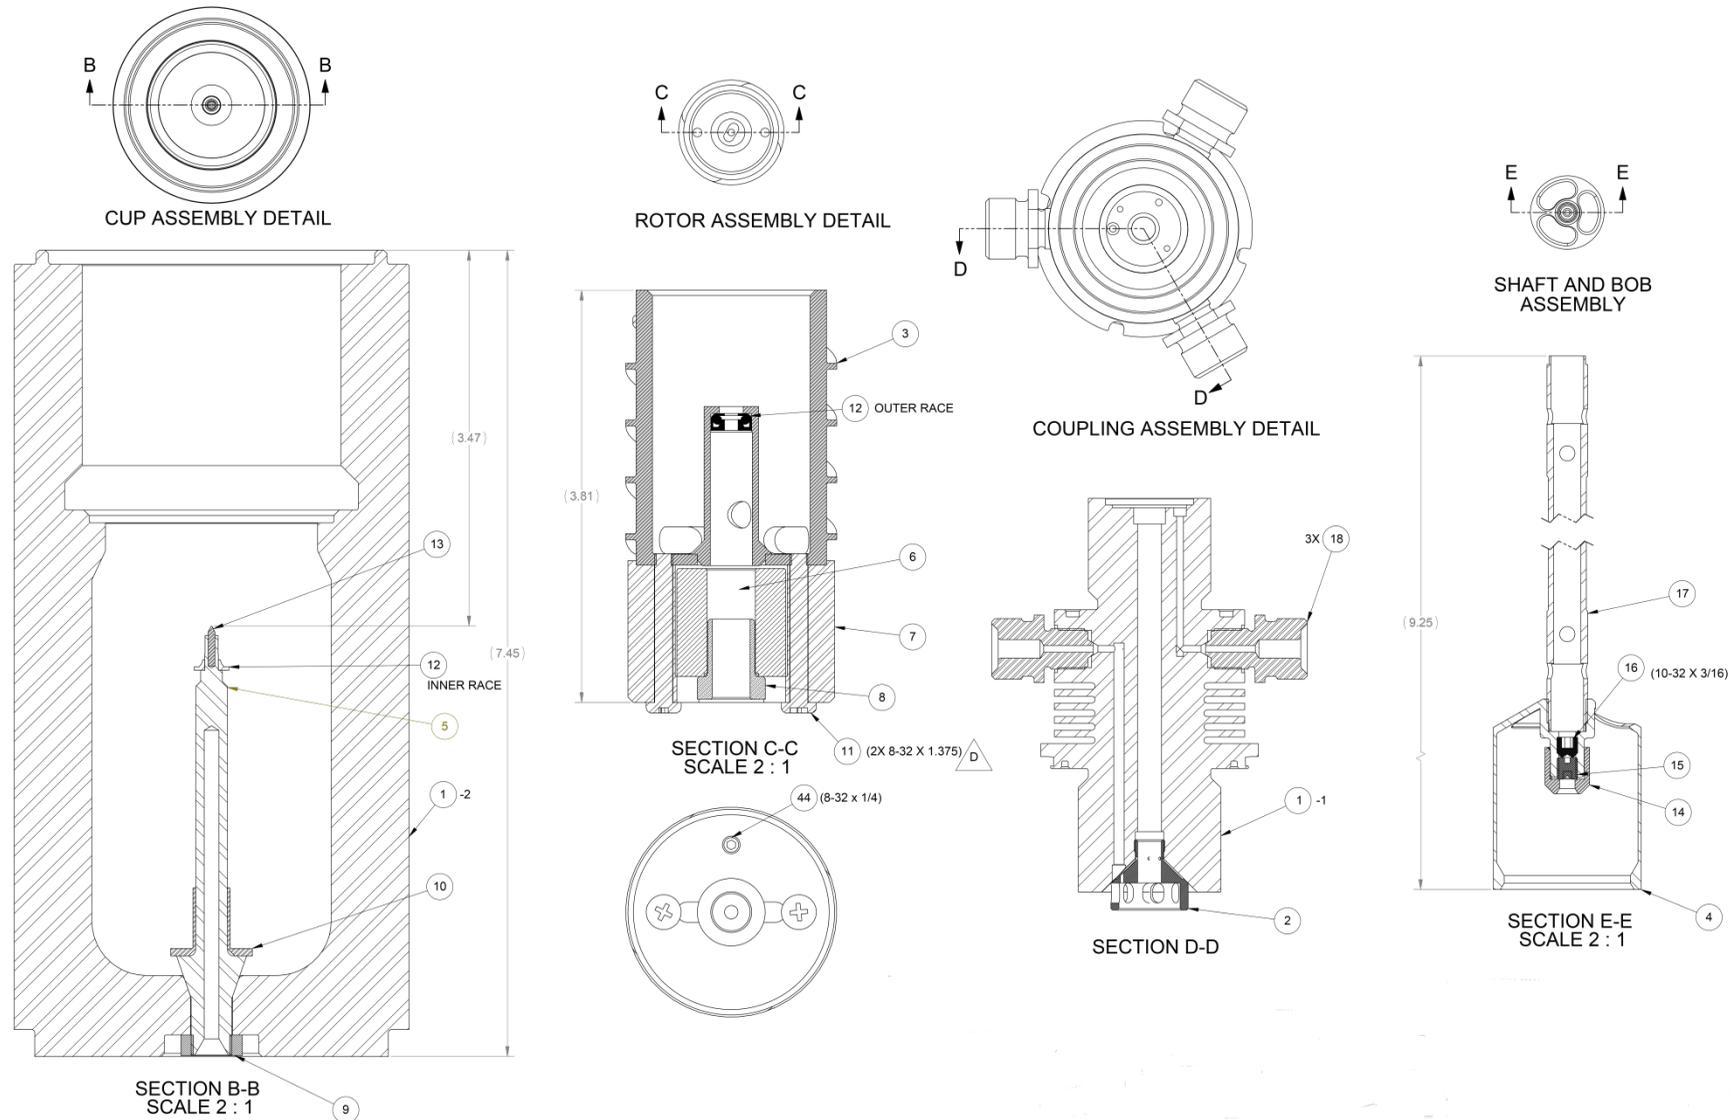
iX77 Cell Cup, Rotor, Coupling, Shaft & Bob
